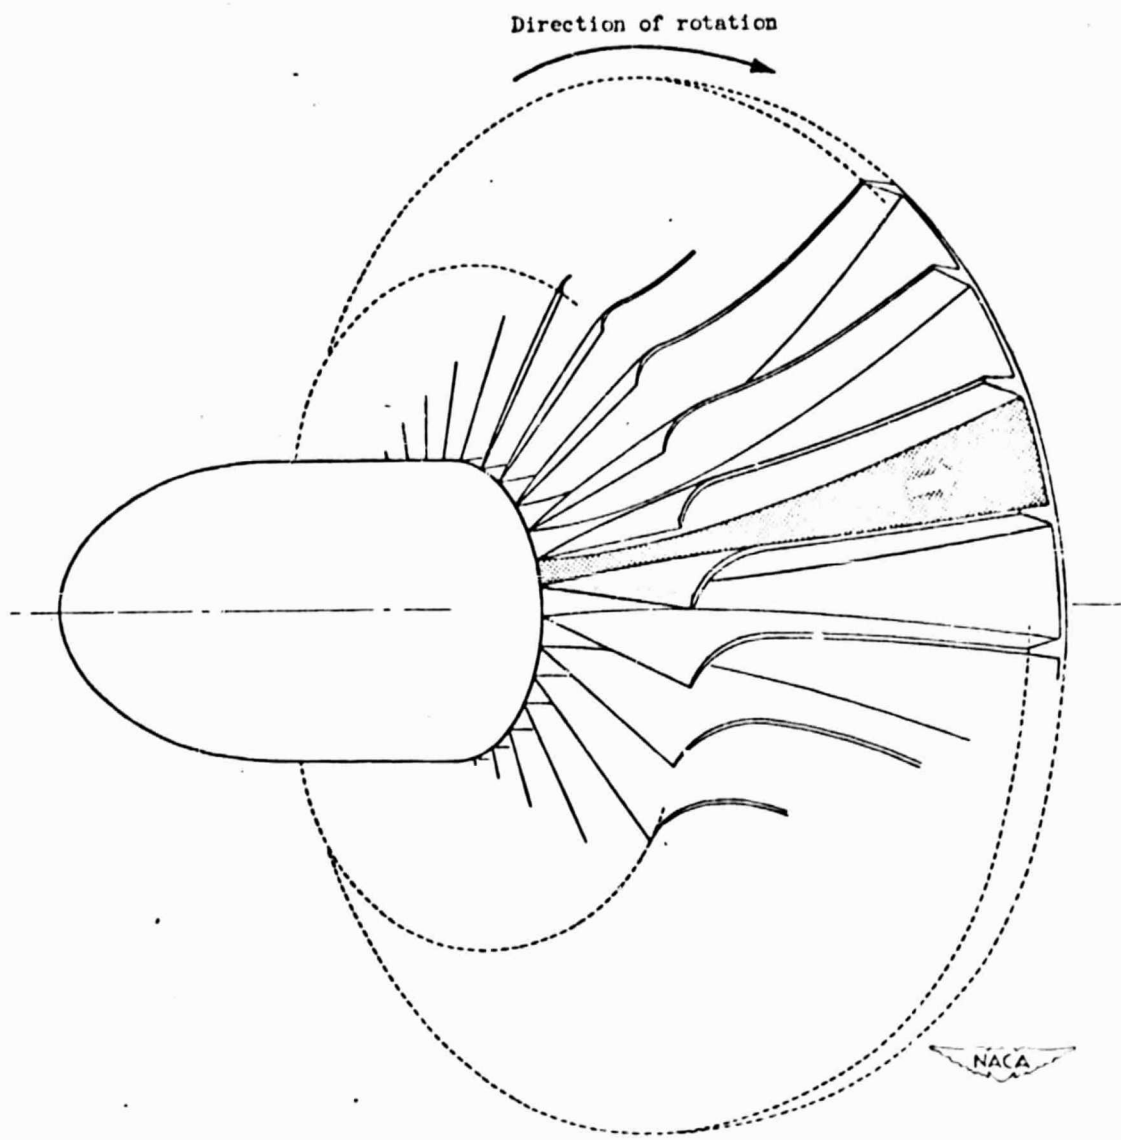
PASSAGE BETWEEN BLADES IN IMPELLER OF TYPICAL CENTRIFUGAL COMPRESSOR.
